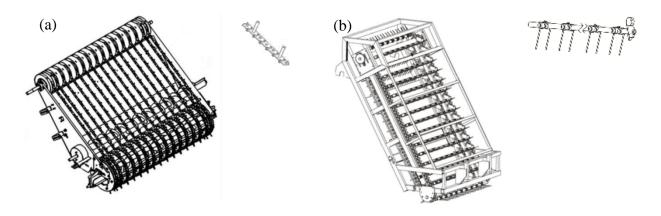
Key core components of the tooth-chain-type residual film recycling machine
